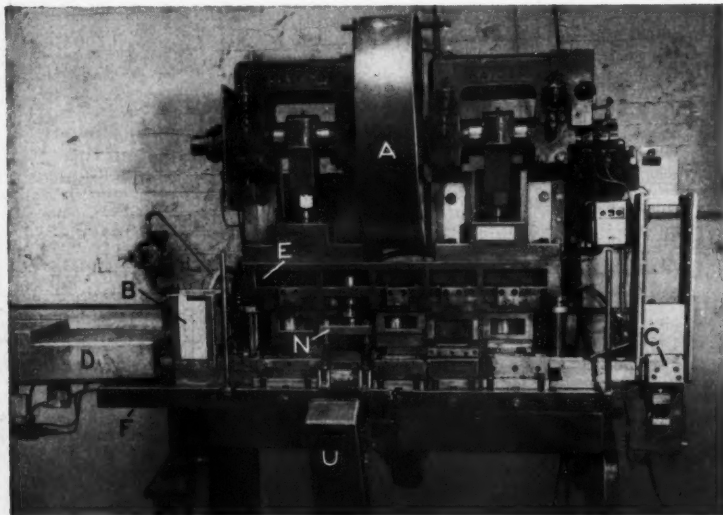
General view of the Ratzer press and Adrema-built tooling equipment employed for the production of Bradma printing plates from aluminium alloy. An output of 80 plates per min. is maintained
